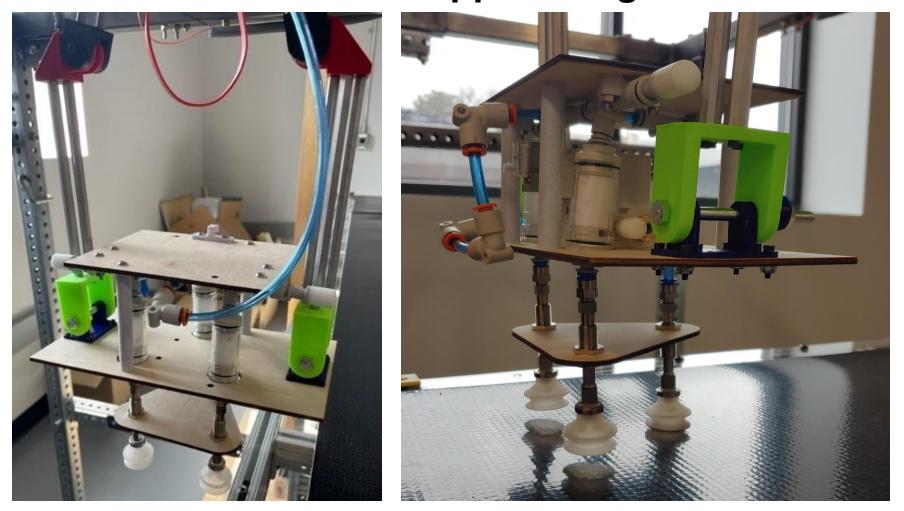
Front and side view of gripper design • A new gripper was designed to pick up flat pieces of cardboard Vacuum gripping was chosen and proved most reliable
